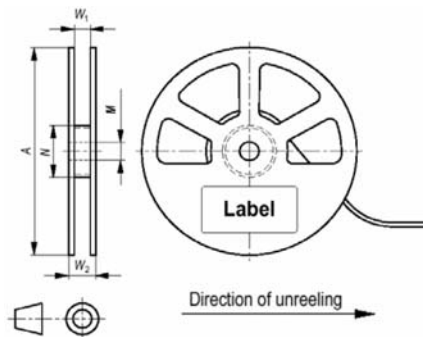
Reel dimensions. All dimensions in millimeters [mm].
